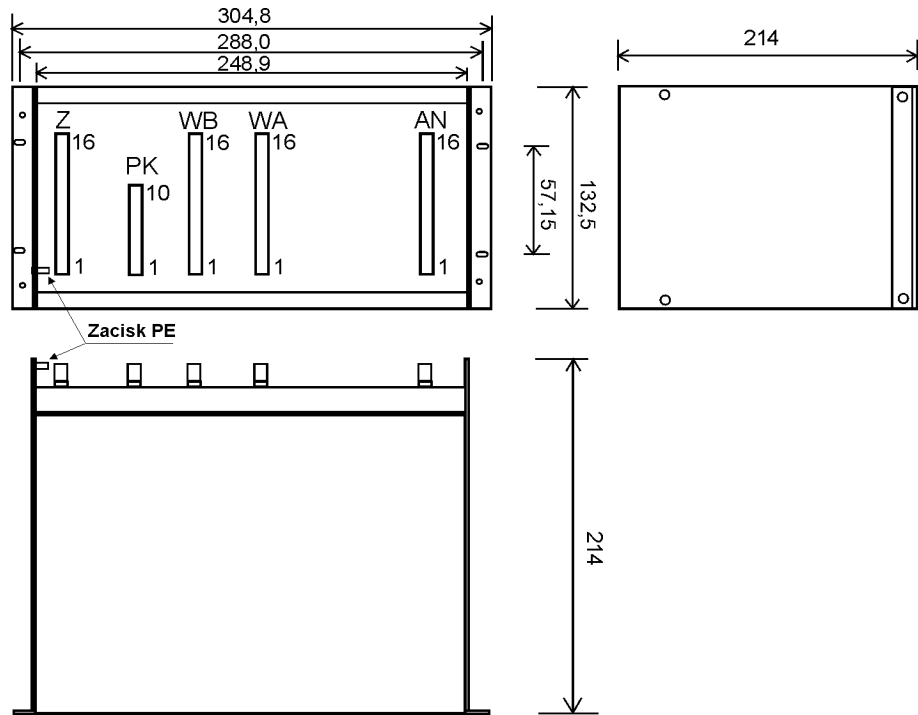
Version 2: Back panel mounting housing with a width 49T
